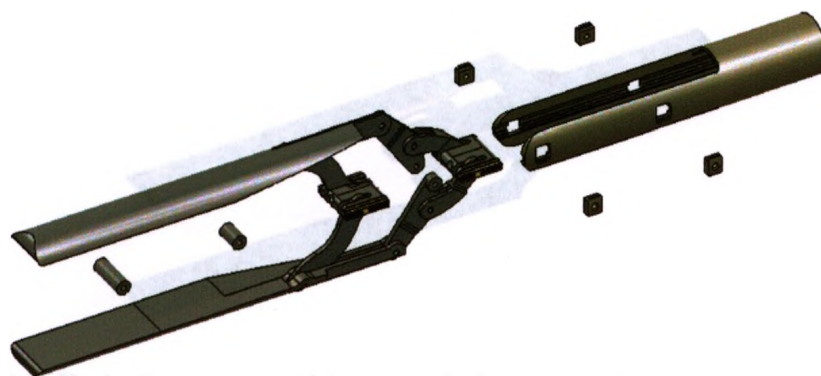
End effector assembly, Step 4: Connecting the PEEK slider covers over the sliders.
